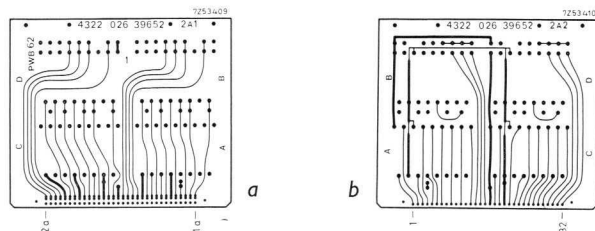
The PWB62. (a) track side, (b) pad side
